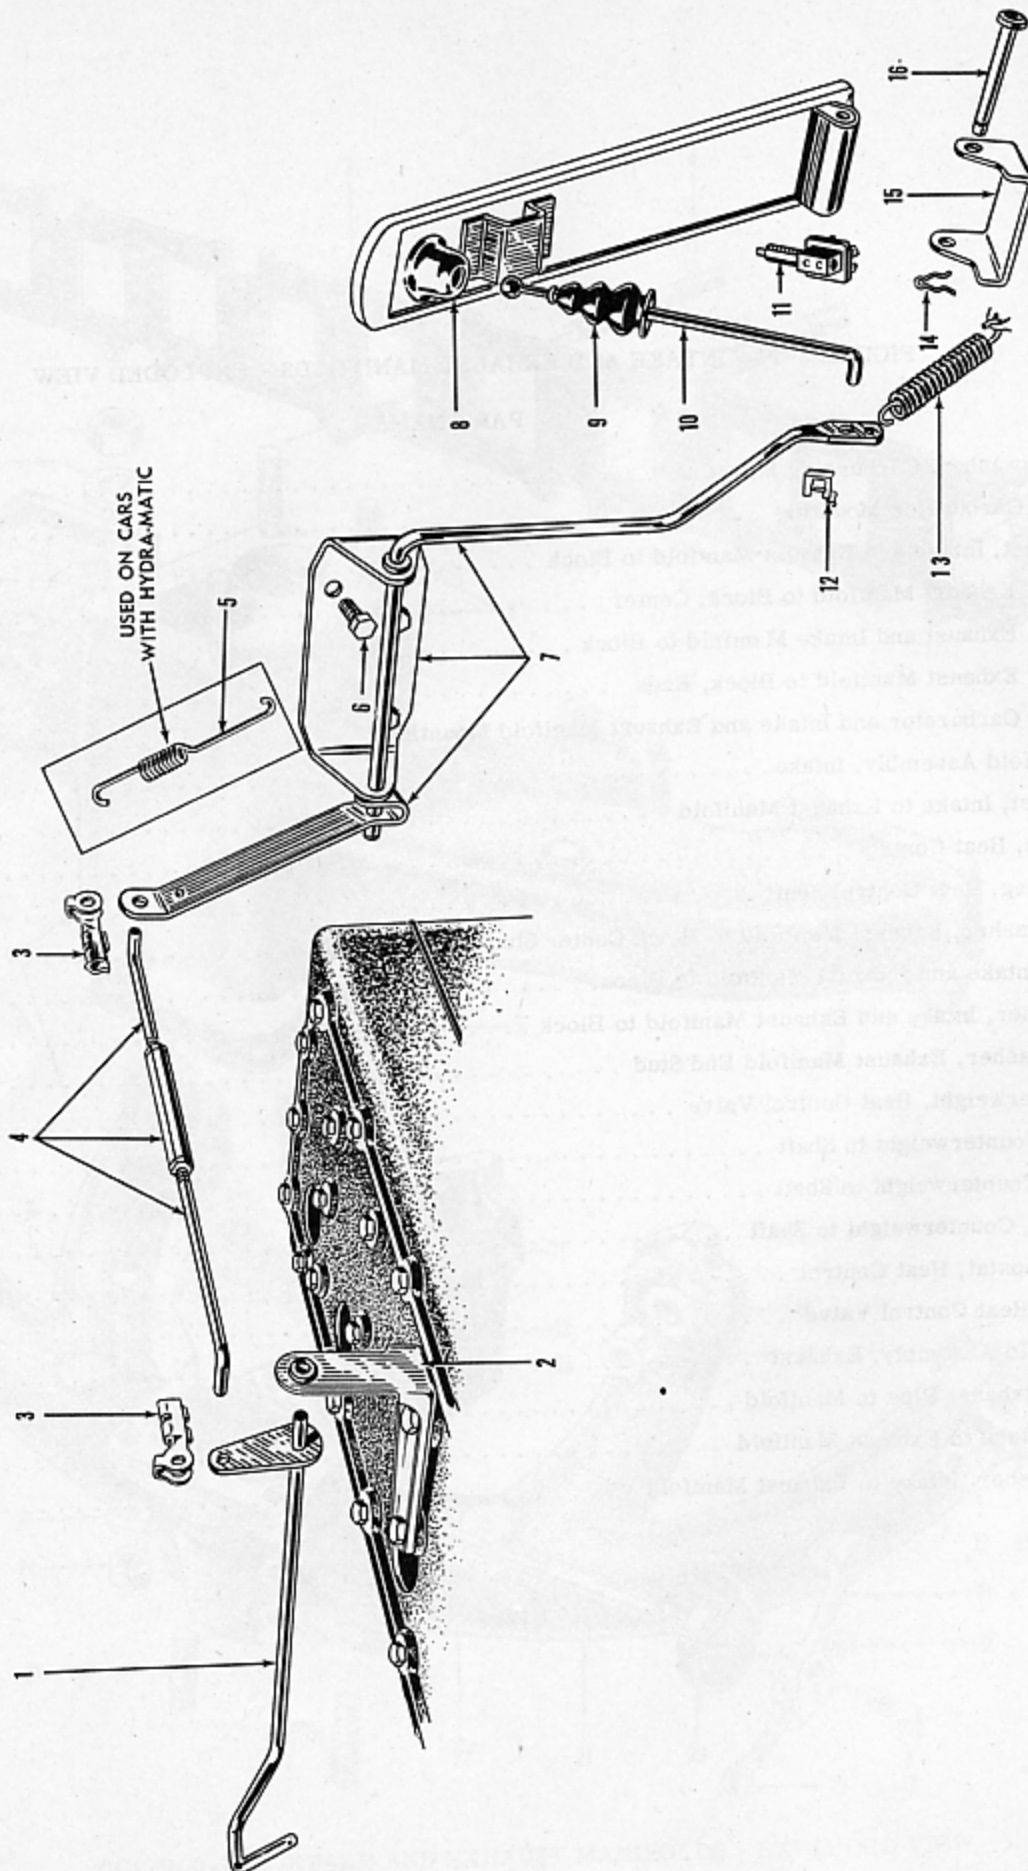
ACCELERATOR LINKAGE - EXPLODED VIEW
